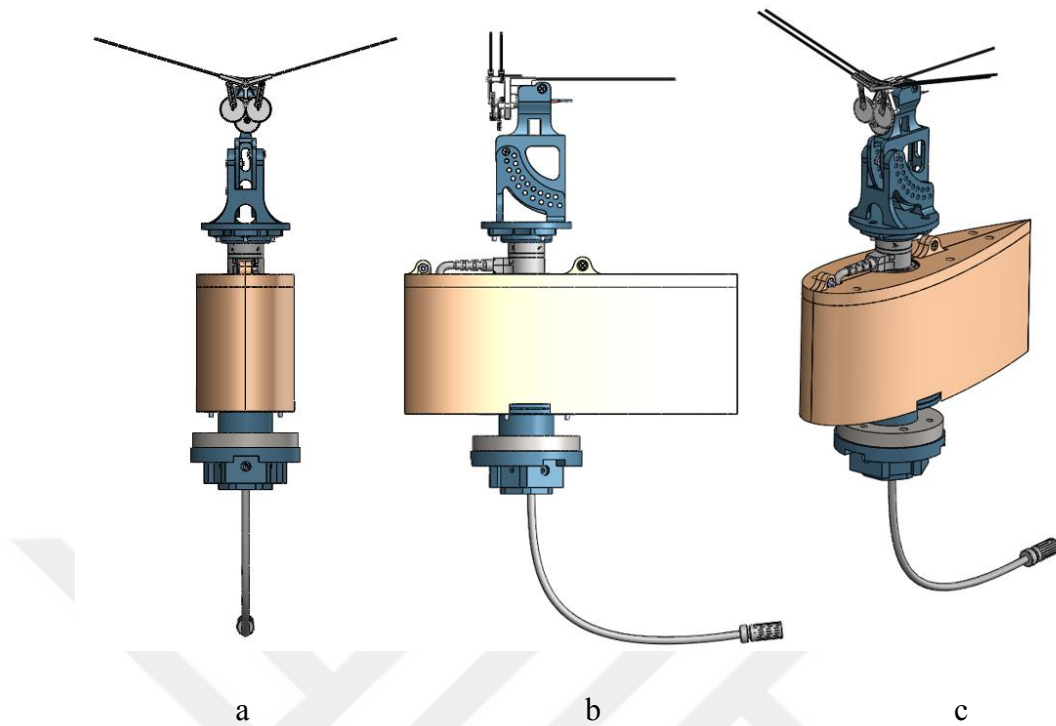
Developed Flapping test stand a) Front view b) Side view c) Isometric view
